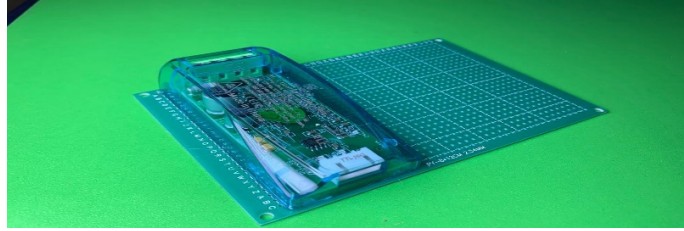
Mounting of the PZEM-004T measurement module on the perforated board
